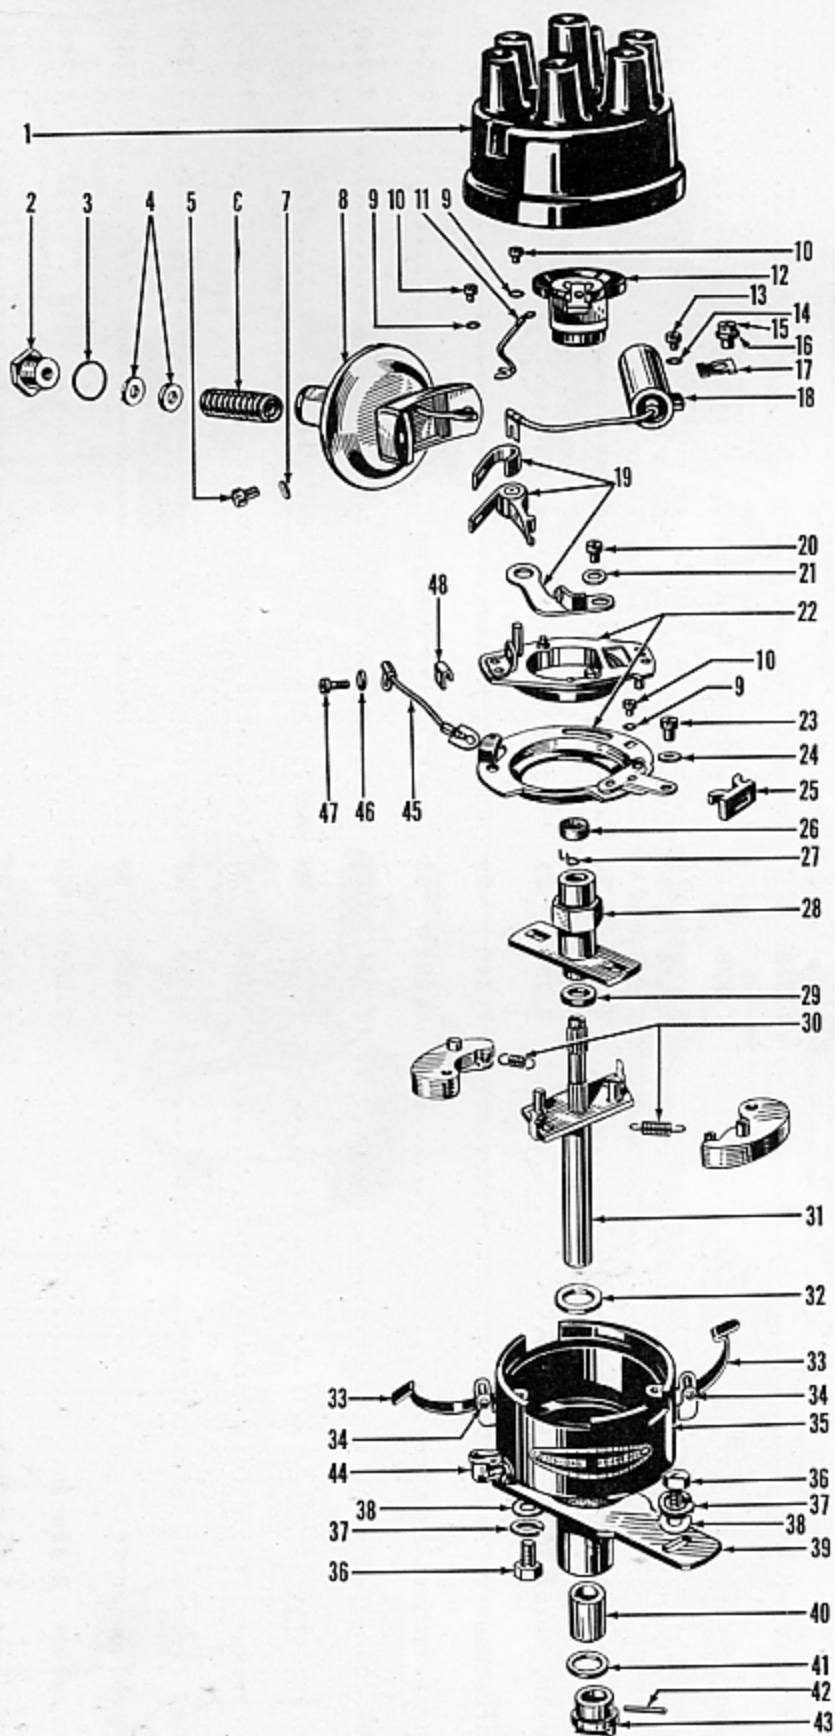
TYPICAL DISTRIBUTOR - EXPLODED VIEW
